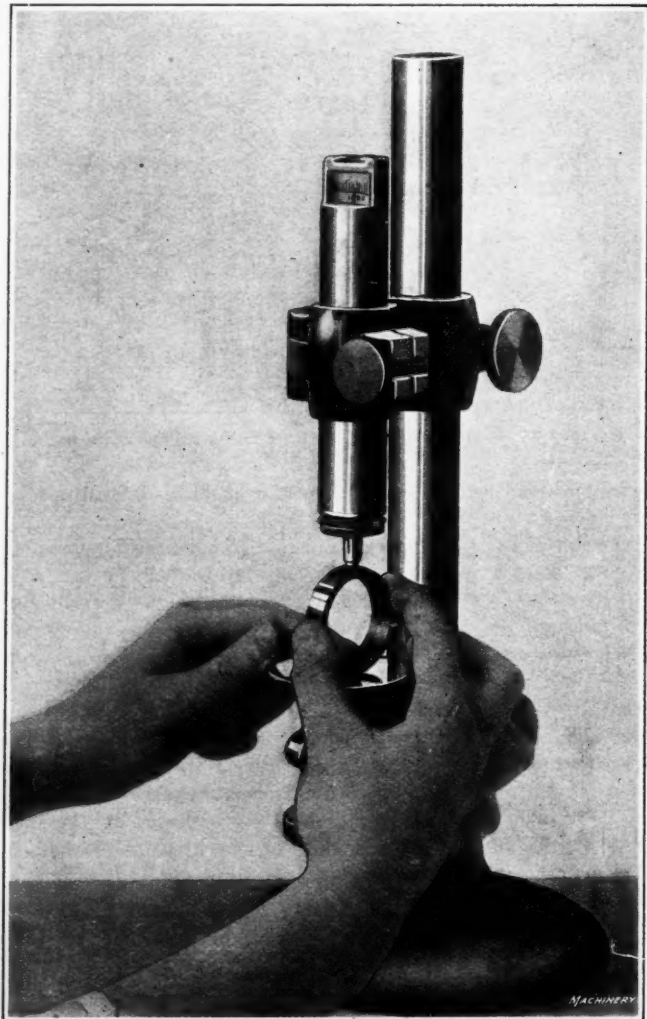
Hirth Minimometer set up and in Use for testing External Diameter of Ball Bearing Race Rings
